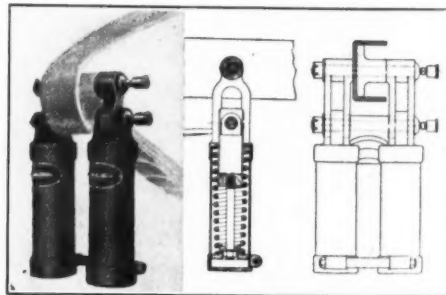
Cox shock absorber. Left, showing attachment to rear spring. Center, vertical section, giving details of construction. Right, illustrating attachment to front spring
